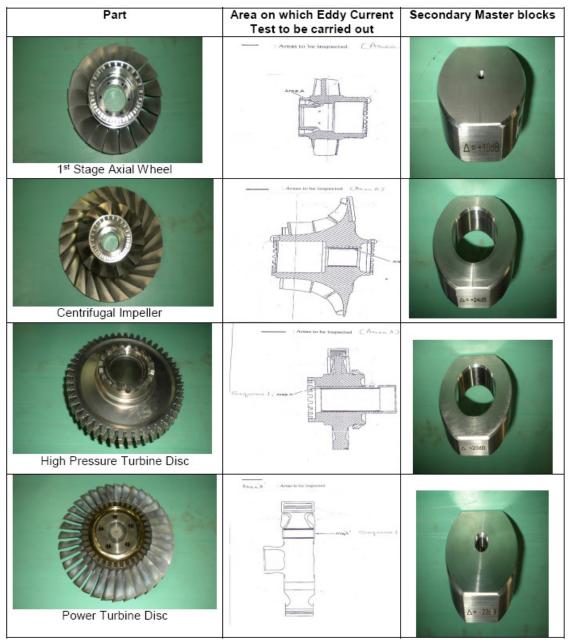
Photograph of the parts, Secondary master blocks and drawing shows critical areas of bore where Eddy Current Inspection is carried out.
